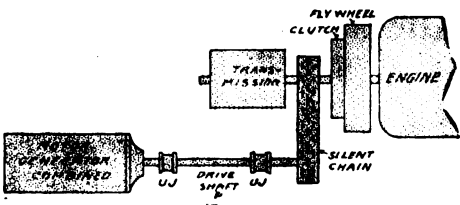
The generator and starting motor are combined in one. Drive is through transmission shaft by means of a silent chain. The ignition is independent. This is a "two unit system." This system formerly used on Chalmers, see chart 171.
